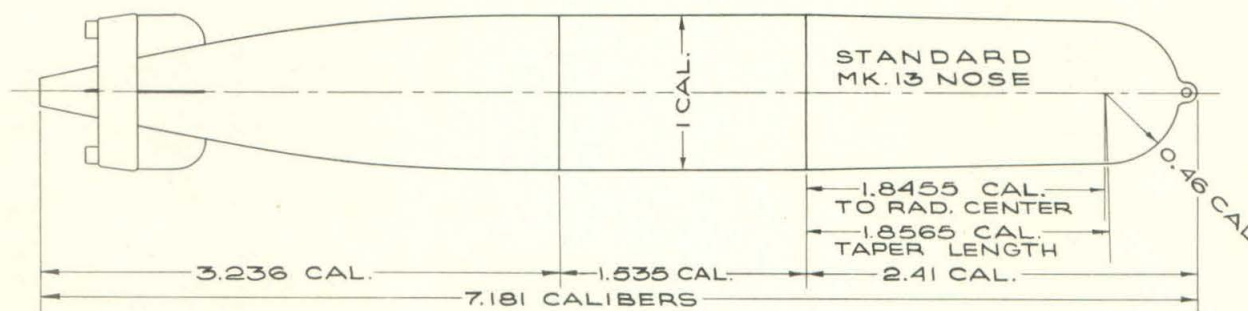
OUTLINE OF MK 13-6 TORPEDO WITH HEAD F
